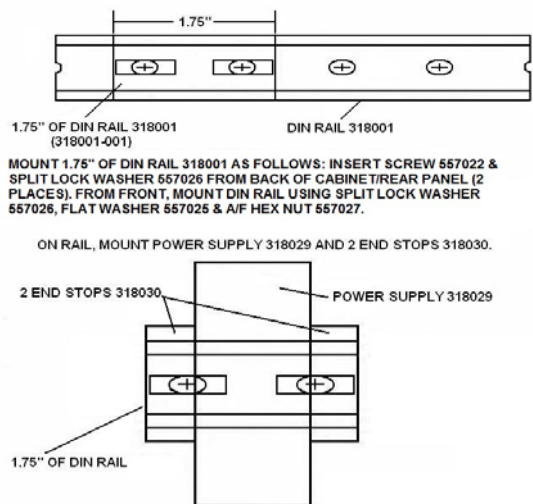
Typical mechanical detail of mounting DC power supply for Cascade Controls
